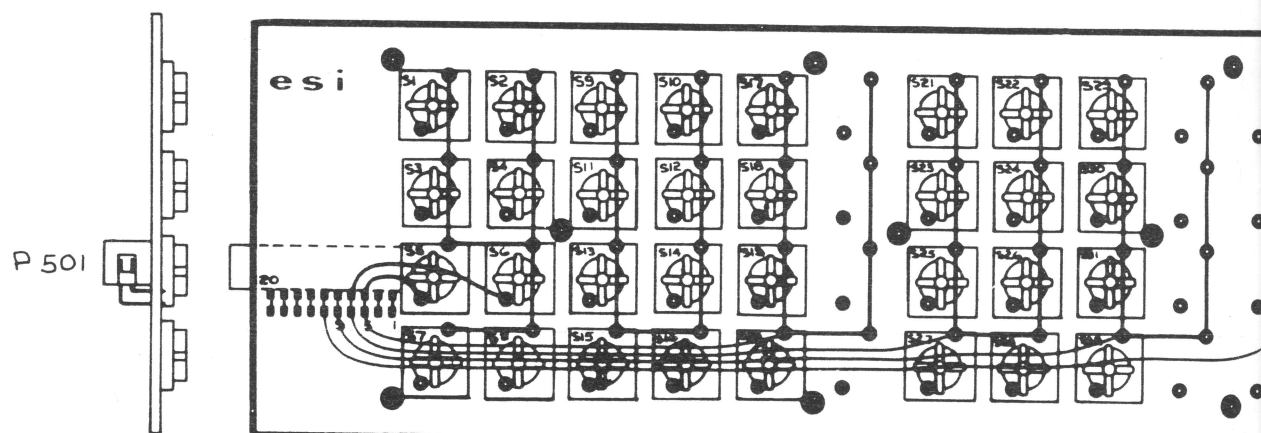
Keyboard Circuit Assembly (P/N 45573)
